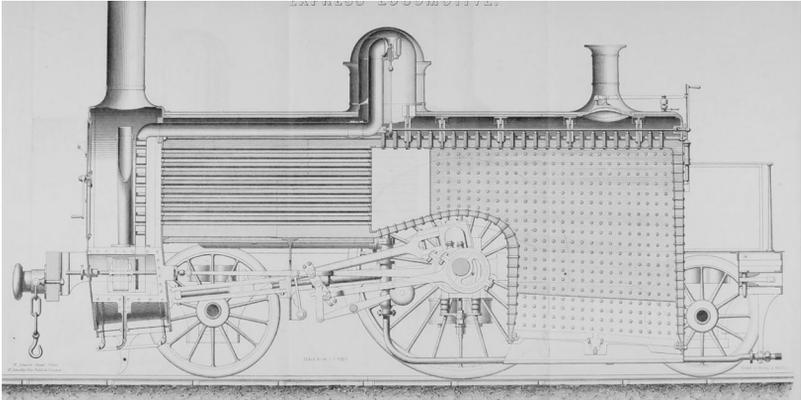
A mechanical drawing of a locomotive from Armengaud's examples.
